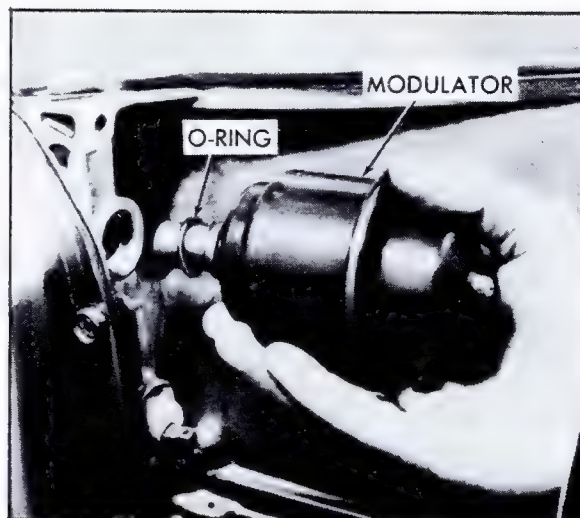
Removing Vacuum Modulator and O-Ring
